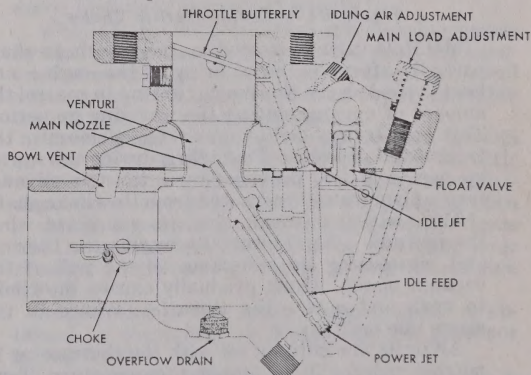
Sectional View of the Marvel-Schebler Carburetor
